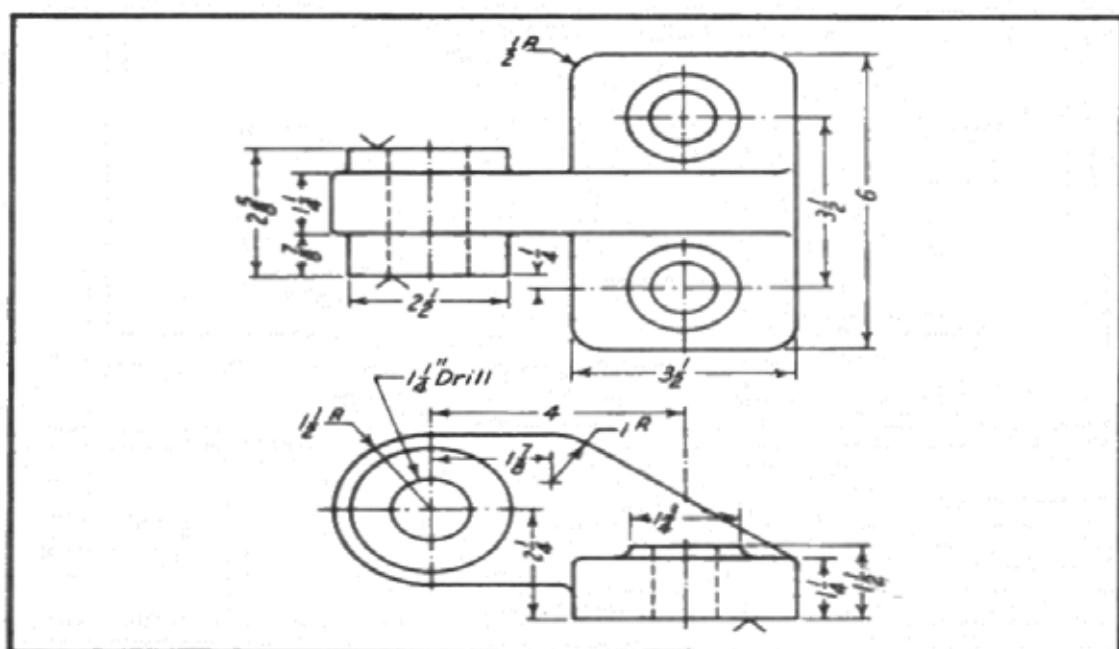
Detail drawing of a casting. Compare with welded part, Fig. 15.
